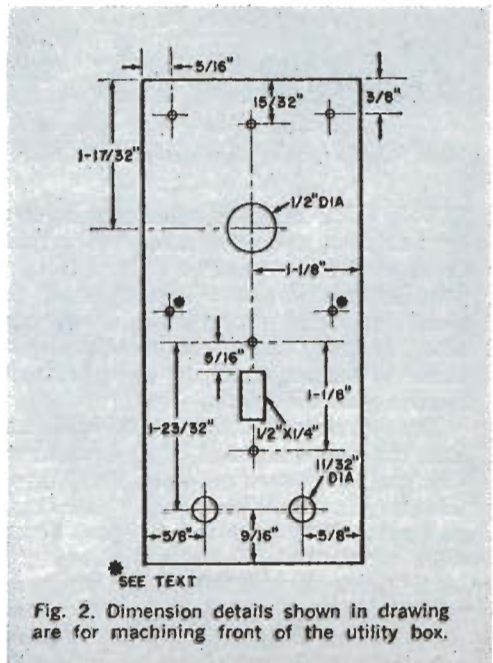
Dimension details shown in drawing are for machining front of the utility box.
